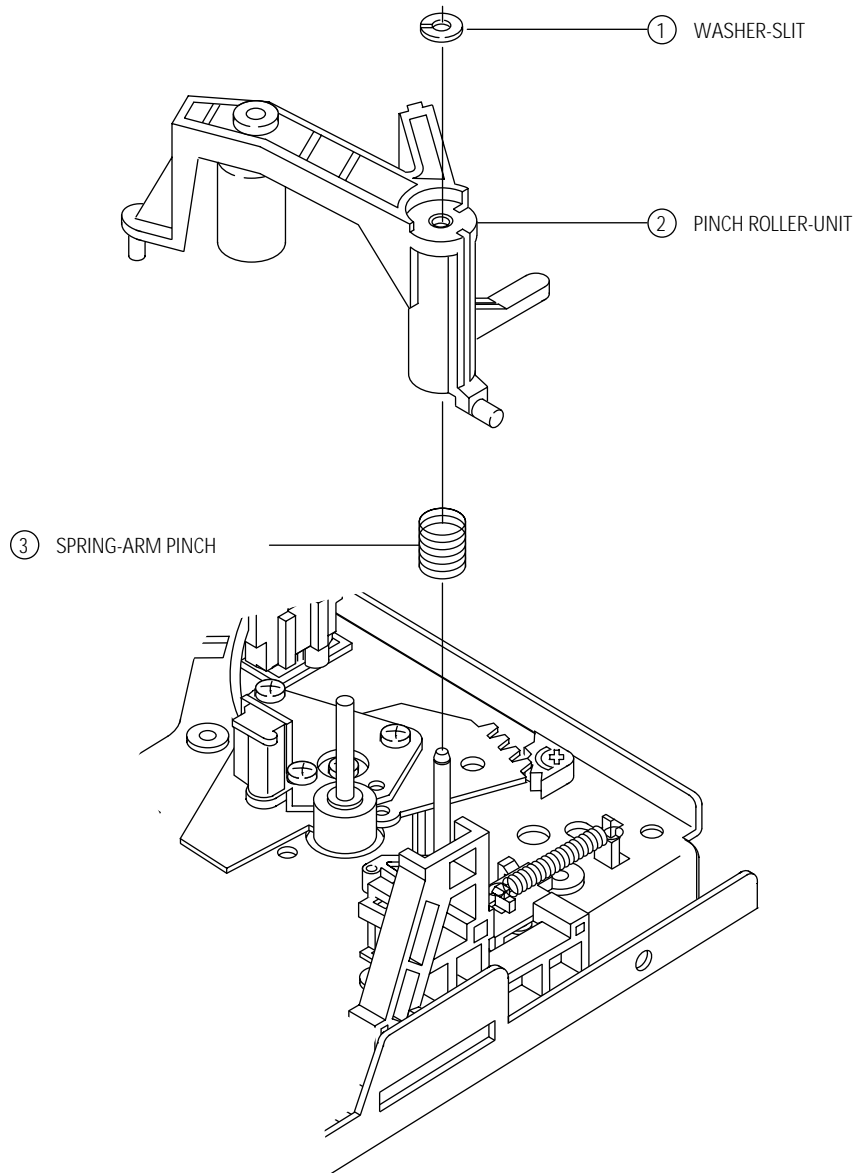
Pinch Roller Unit Ass'y Removal
